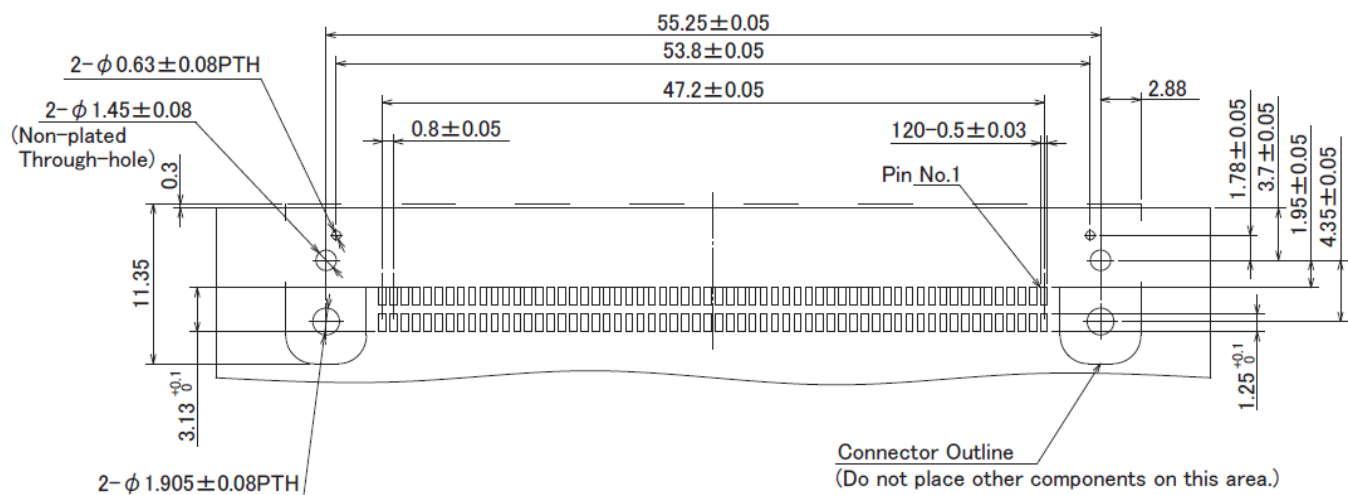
Right Angle Header Receptacle Footprint (dimensions in mm)
